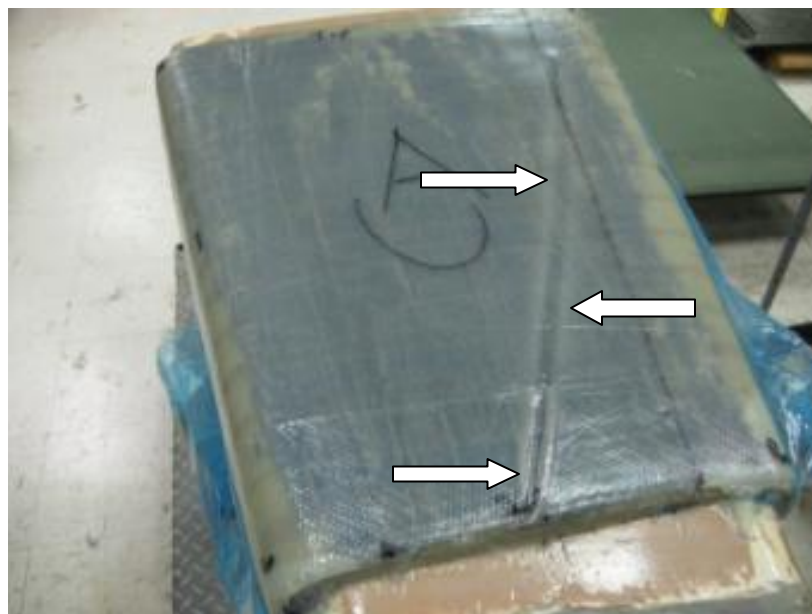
Vacuum tube imprint on flat caul block (NOT DEMOLDED)
